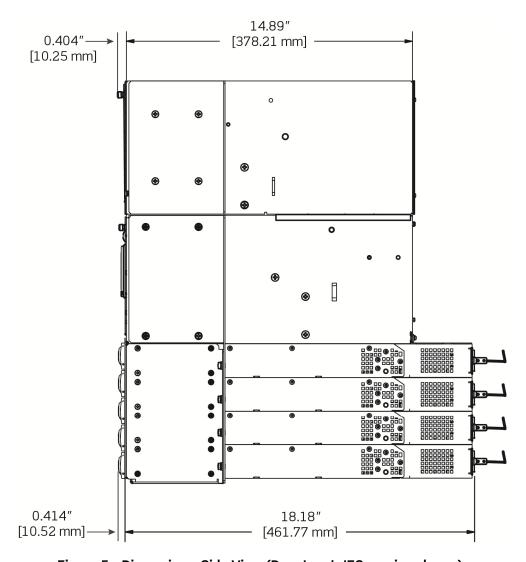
Dimensions, Side View (Rear Input, IEC version shown)
